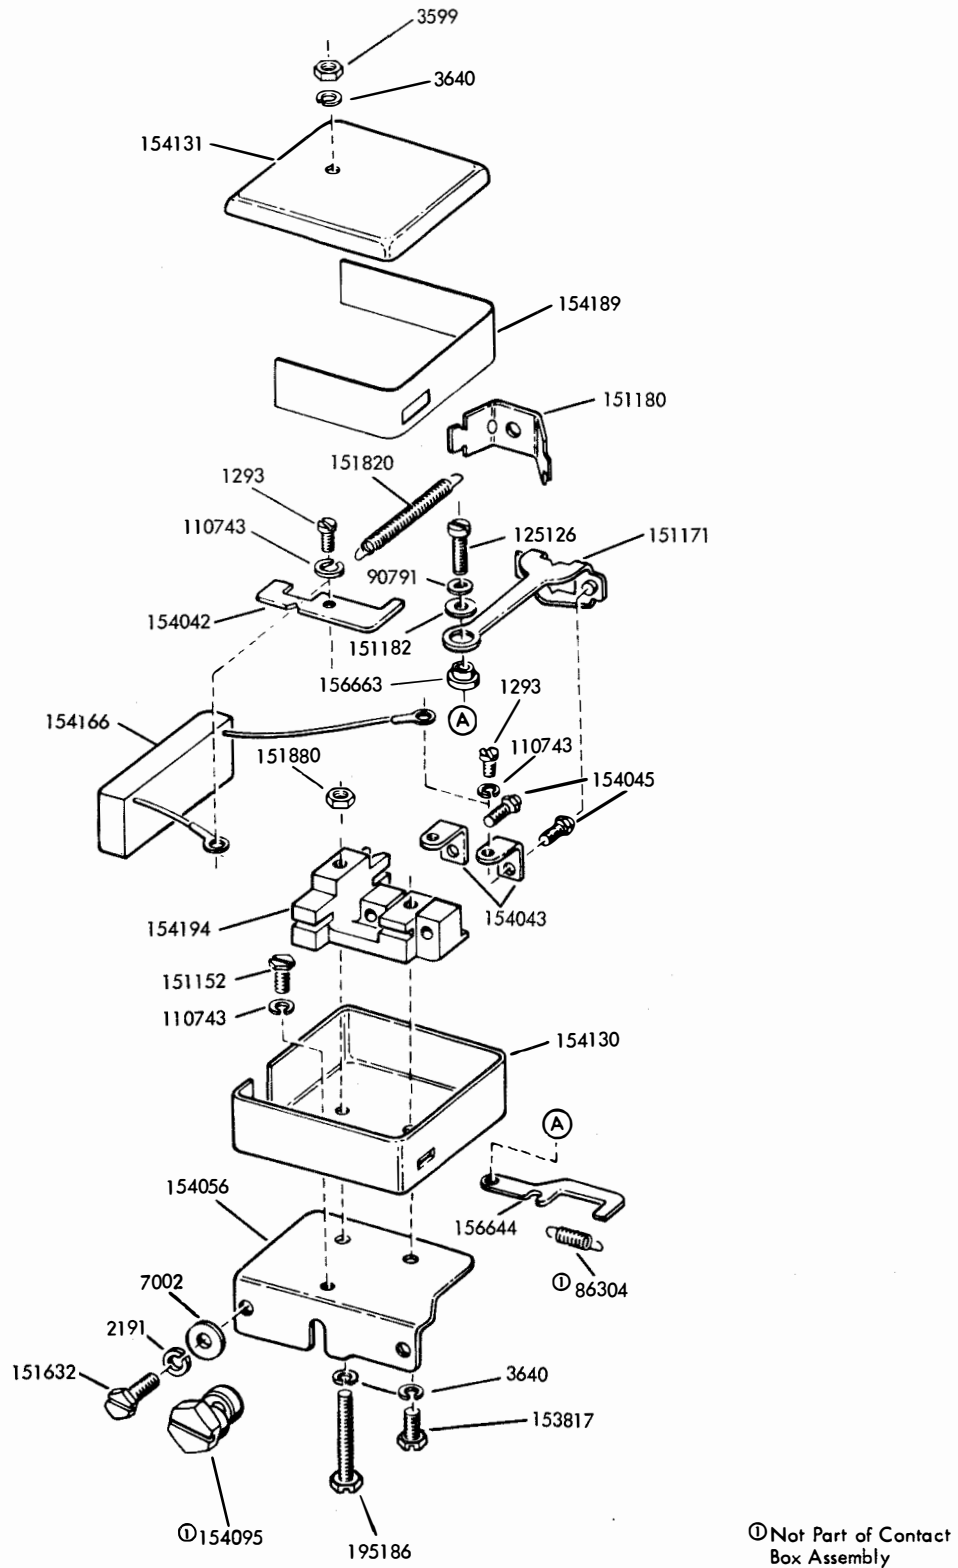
154165 CONTACT BOX ASSEMBLY
